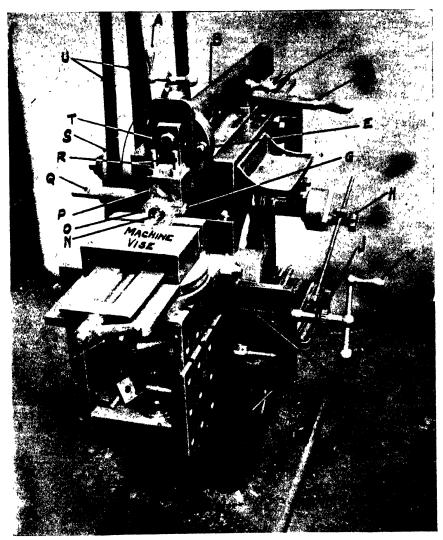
THE OPERATIVE DETAILS OF A SHAPING MACHINE
